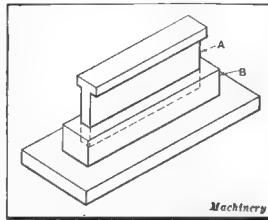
Mold used for compressing the Tungsten Powder into Slug Form
